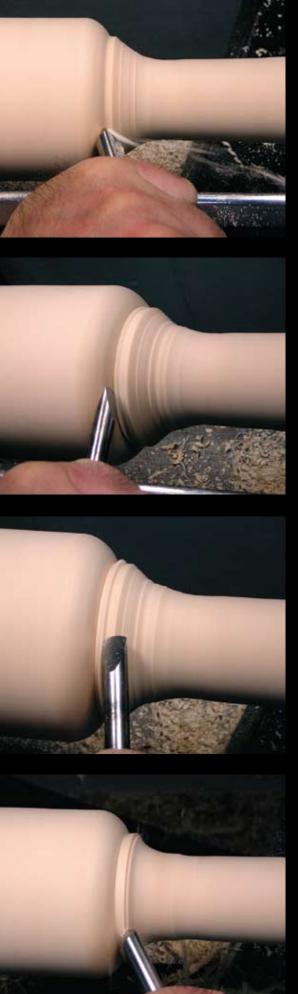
Make a sliding entry from the top with a gouge . You can form the entire bead with the gouge, but the inside corner will not be sharp.
